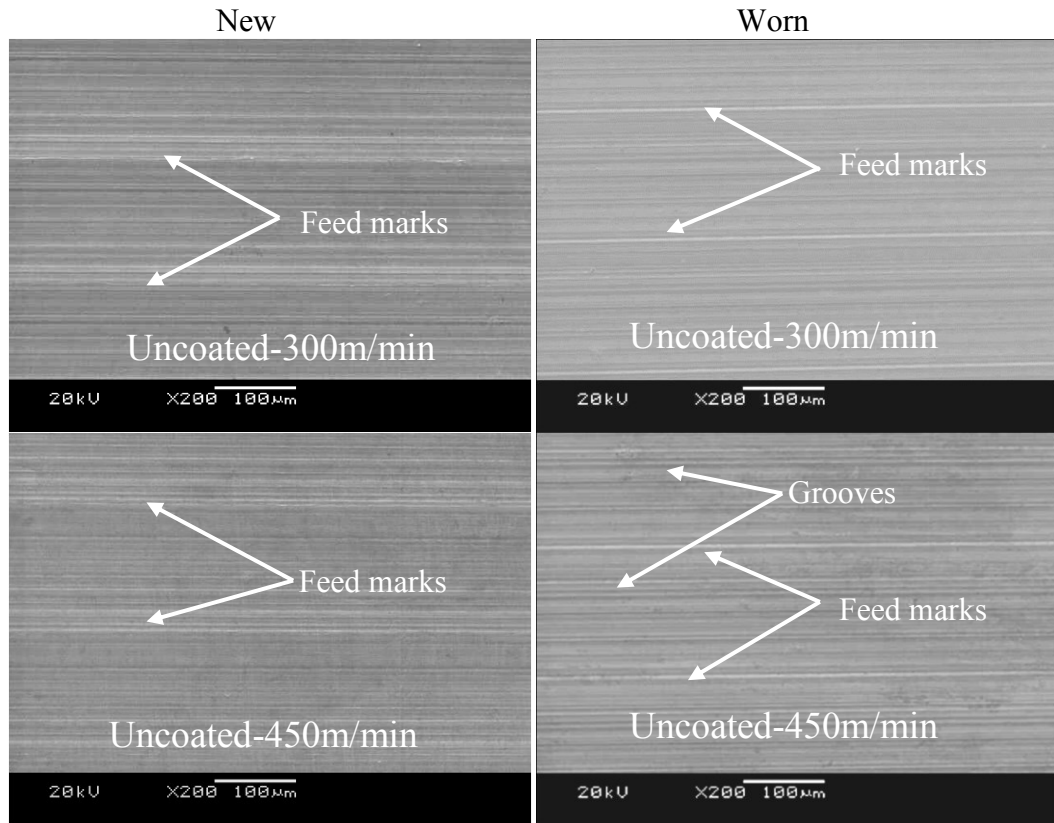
Workpiece surfaces following machining with new and worn uncoated inserts at 200X magnification
